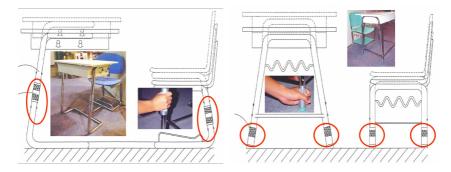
Adjustable devices in combined-type and separated-type desk and chair
